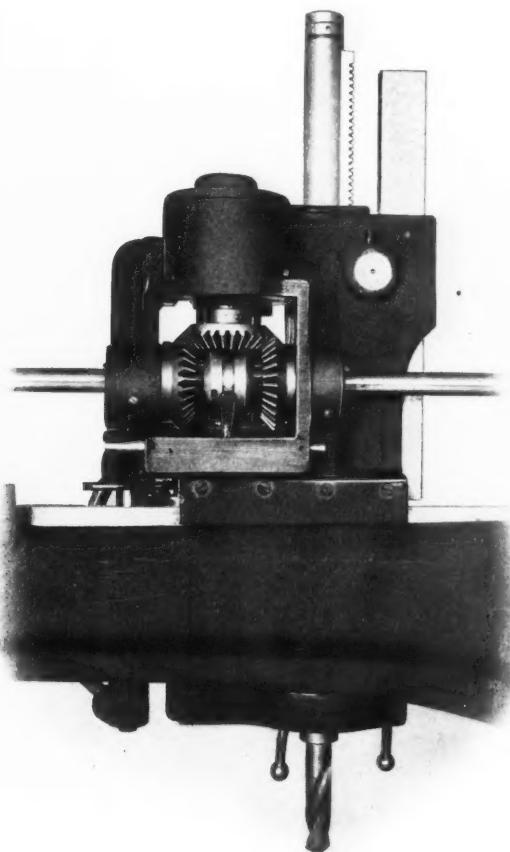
Rear View of the Head, showing Tapping Reverse for Spindle Drive
